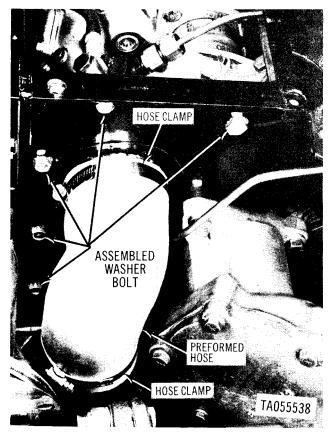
Connecting or disconnecting oil cooler support frame model AVDS-1790-2D and AVDS-1790-2DR engines.
